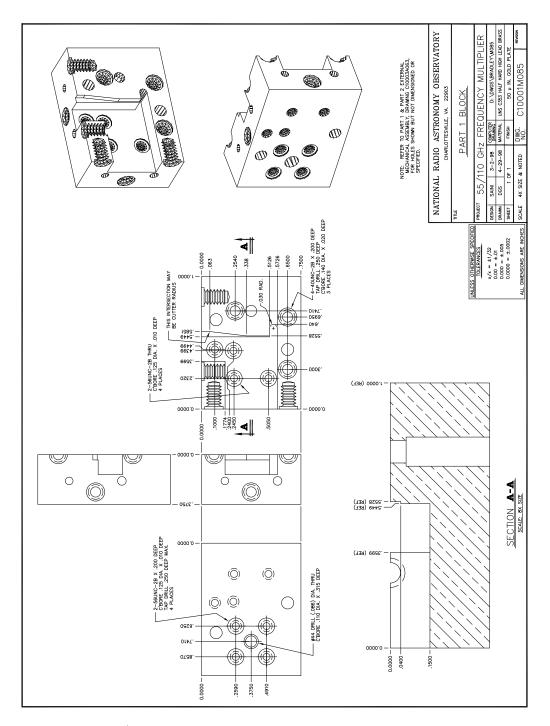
55/110 GHz frequency doubler: Mechanical details of part 1 of the two piece split block.
